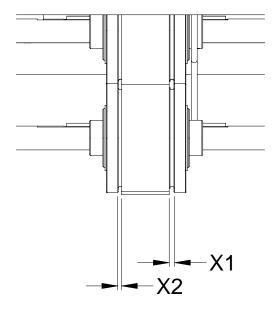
BK800L-3 Belt Tensioning Screws Location
